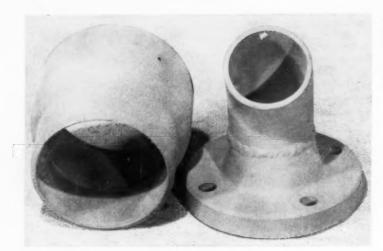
Aluminum-Ceramic Coating Applied to Heavy Pipe Sections. Low-alloy steels are protected up to 1100° F. Note good coverage on welds and sharp corners
